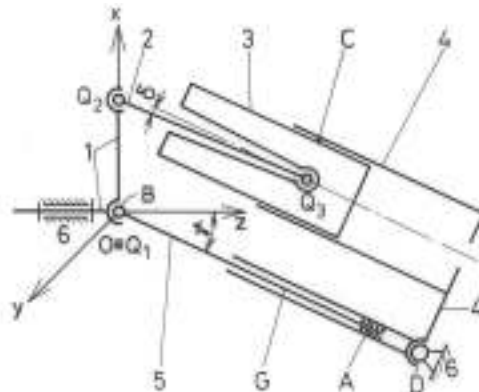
Structural schema of a mechanism with a piston, of an axial piston pump, with the motion transmitting by connecting rods: 1 – driving shaft and flange/crank; 2 – connecting rod; 3 – piston; 4 – cylinder/cylinder block; 5 – guiding axis; 6 – fixed element; L – bearing of the driving shaft; $O \equiv Q_1$ – rotating centre of the driving flange; Q_2 – the joint between the connecting rod and the driving flange; Q_3 – the joint between the connecting rod and the piston; C – the piston inside the cylinder; D – the spherical surface ensemble of the cylinder block and of the distribution plate; A – the pressing arch of the cylinder block on the distribution plate; G – the cylinder block guiding; B – the joint between the driving shaft/flange and the guiding axis
